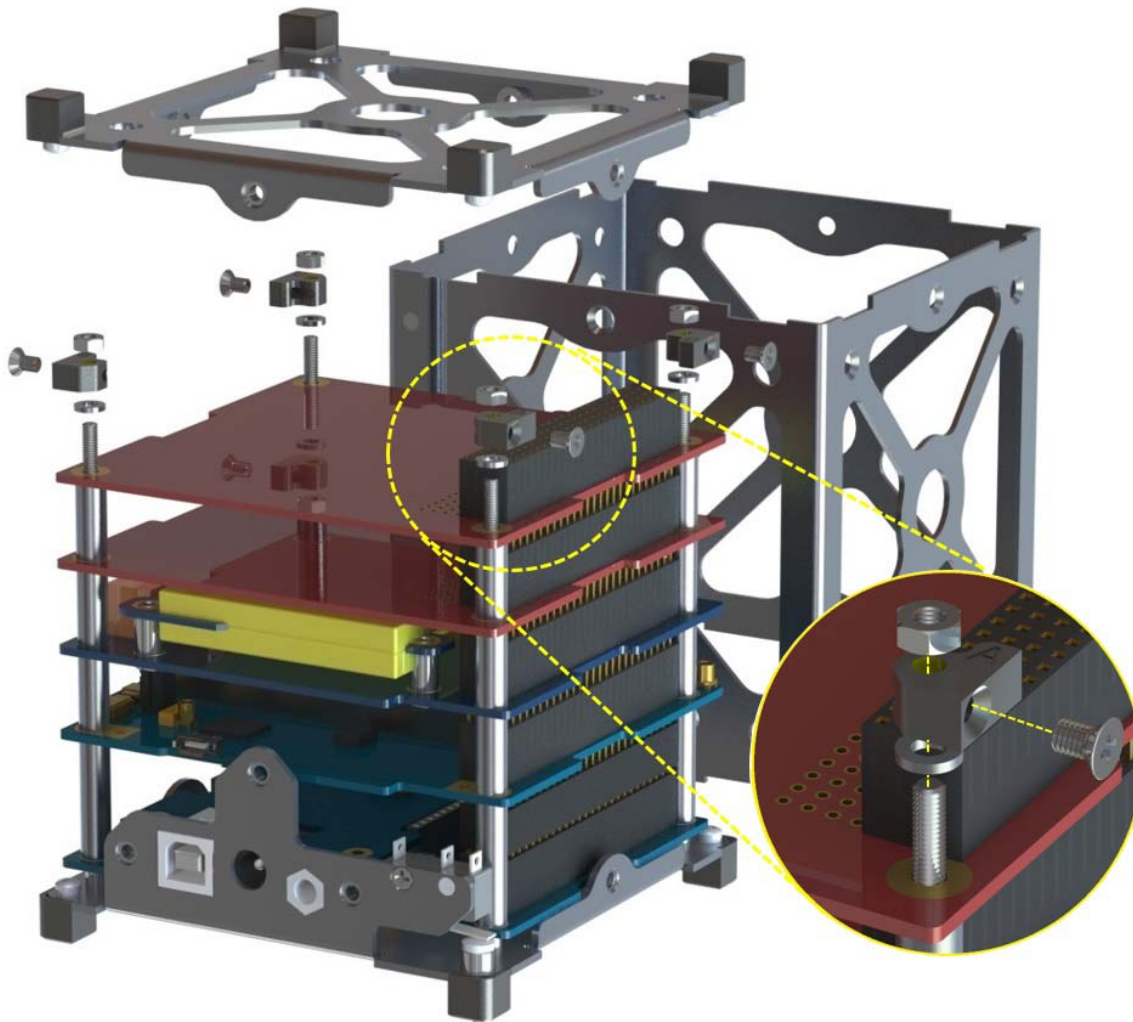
Exploded & detail views of Midplane Standoffs used to secure top of module mounting columns in a Rev D skeletonized 1U CubeSat Kit structure. Note the use of threaded M3 rods and M3 aluminum through standoffs.
